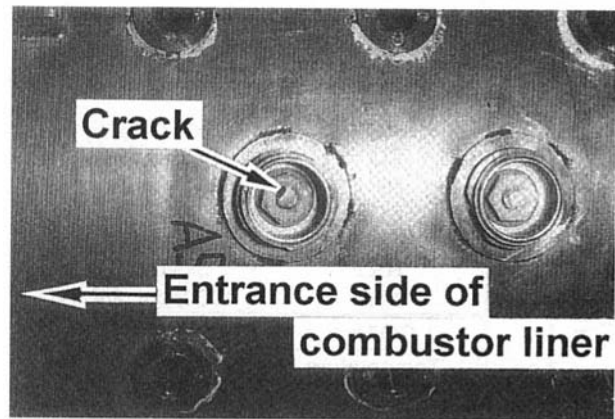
Crack at screw of bolt (entrance side of combustor liner)
